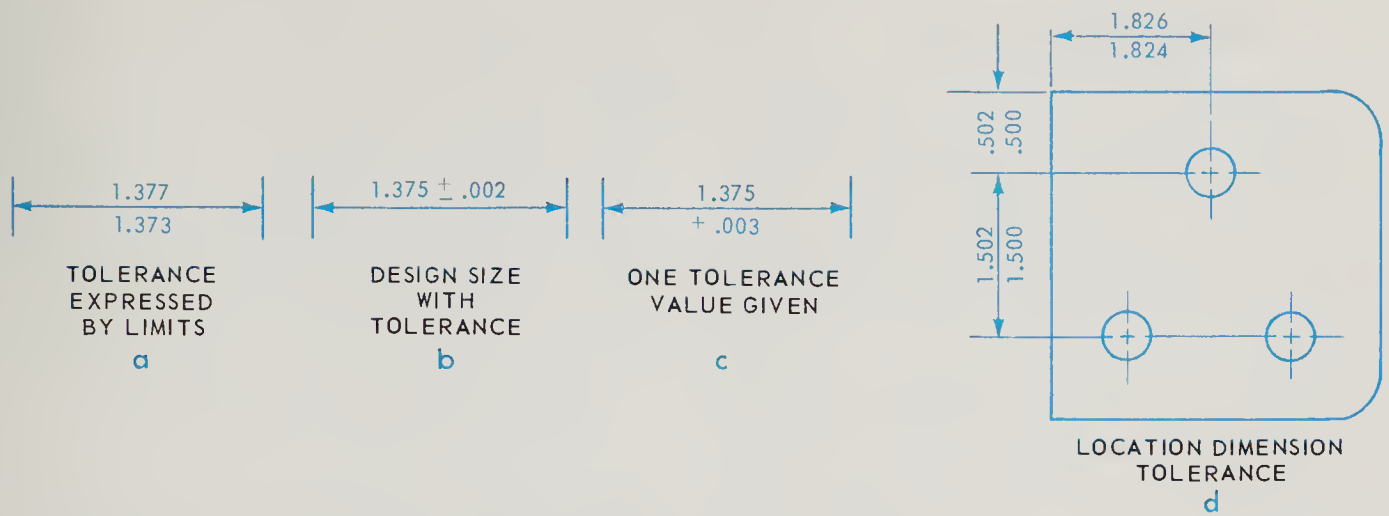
Tolerances indicated in dimensioning.
